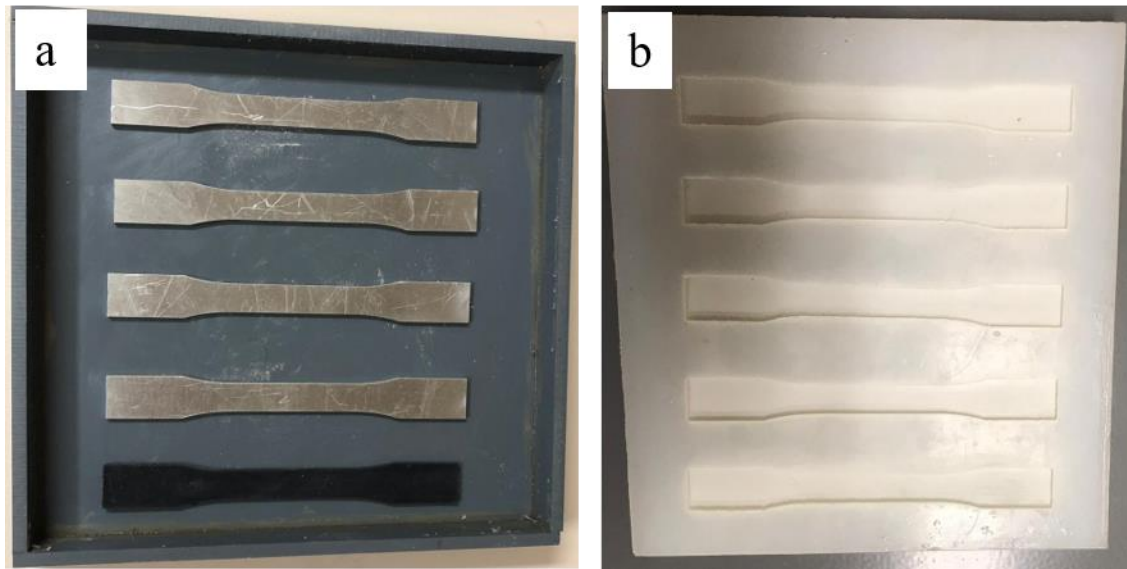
A photograph of (a) plastic mold with aluminum tensile samples and (b) prepared silicone mold for tensile samples.
